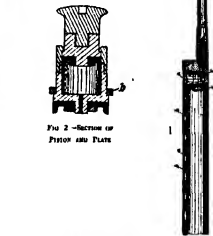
Sectional elevation of the hydraulic mining cartridge.
